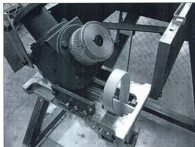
Gearbox and its mounting plates installed to allow gearbox pivoting.
